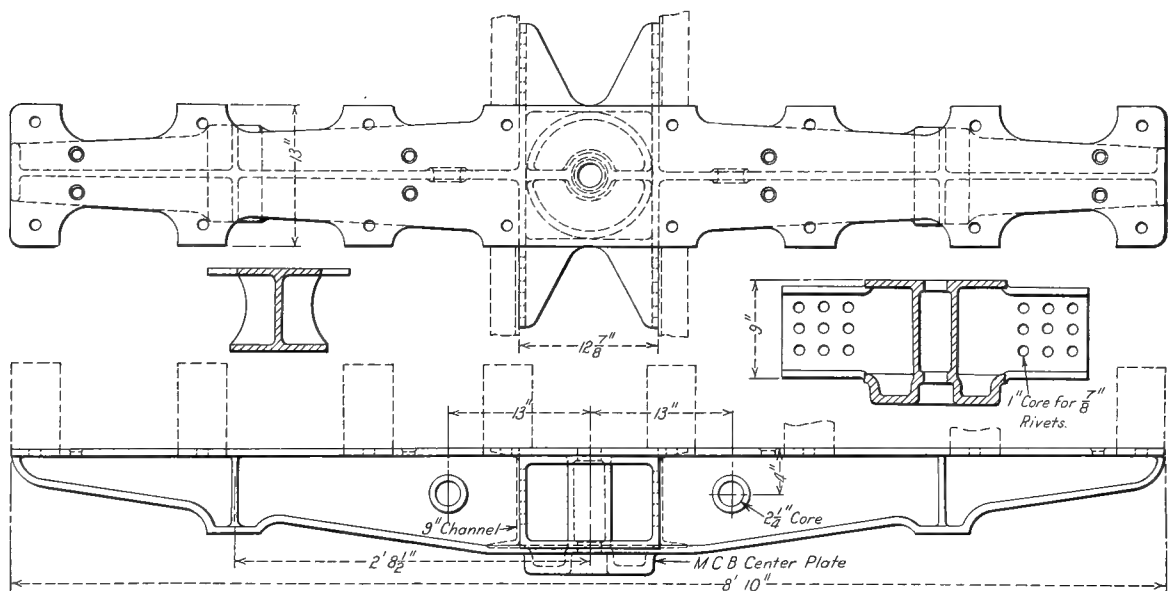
Gould Cast Steel I-Beam Type Body Bolster. Gould Coupler Company.
